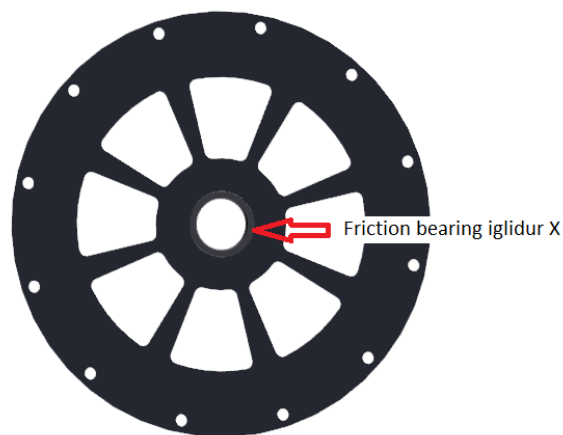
Stainless steel bearing plate with the installed friction bearing made of iglidur®X
